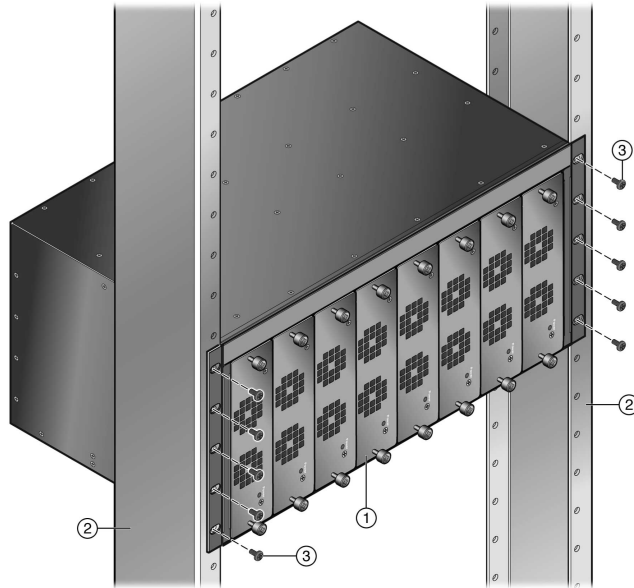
Fastening the STK-RPS-150CH8 to the Rack
